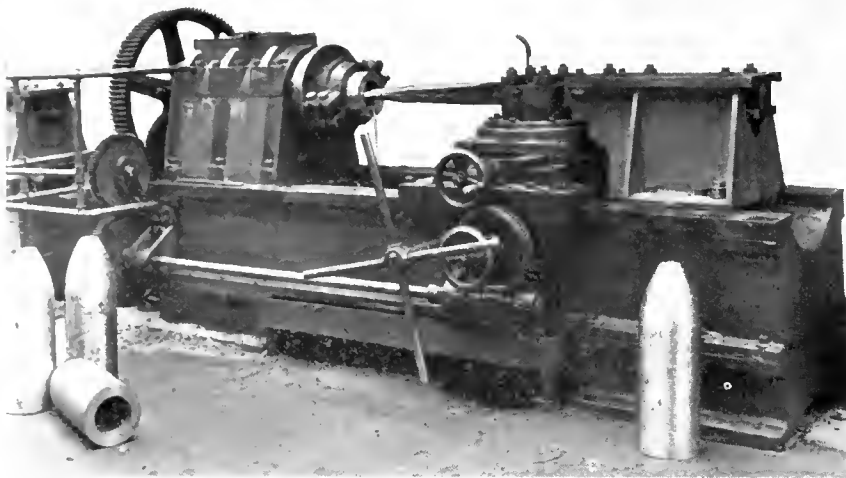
SHELL-BORING LATHE WITH SWIVELLING BAR CONTROLLED BY PROFILE CAM.
